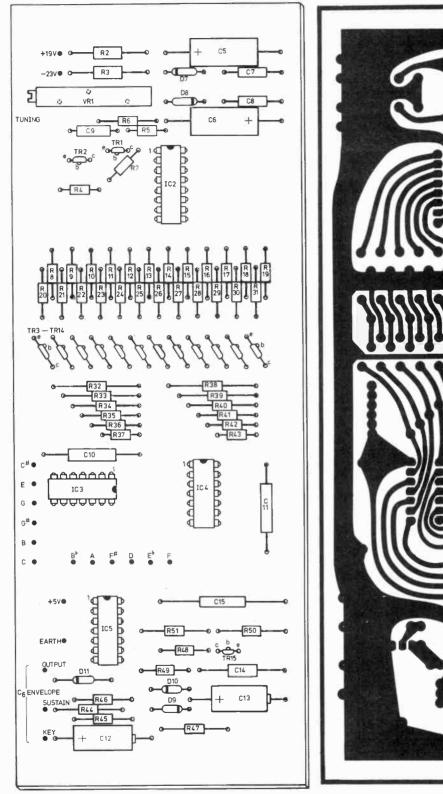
Etching details and component layout for Master Tone Generator and Top C Board
